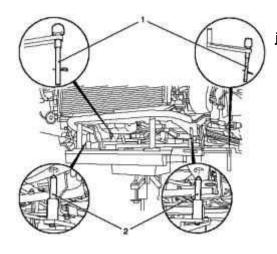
Fixing the front axle on jack: 1, 2 - pins
